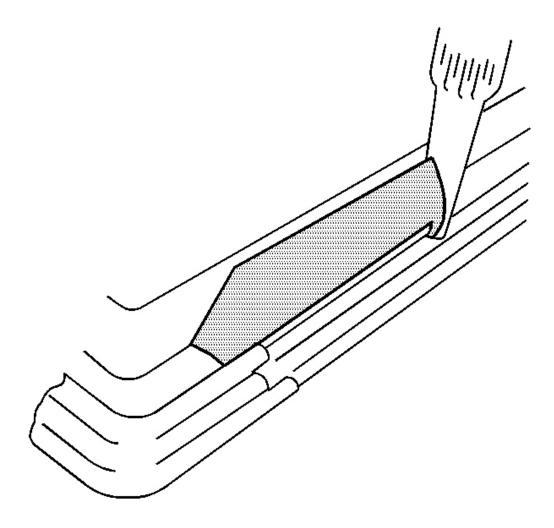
View Of Modified Applicator Nozzle Courtesy of GENERAL MOTORS CORP.
